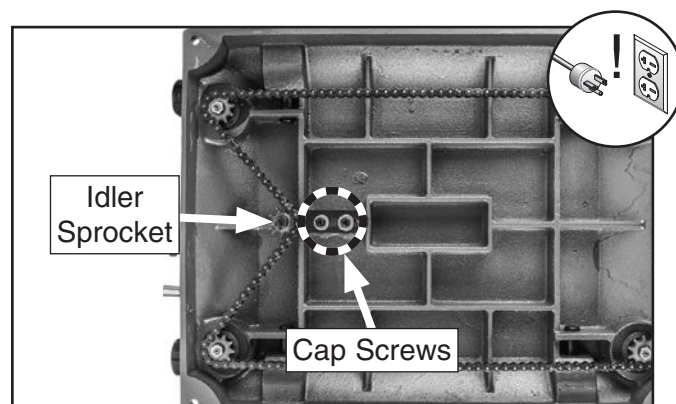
Table height chain adjustment (shown without stand for purpose of illustration).
